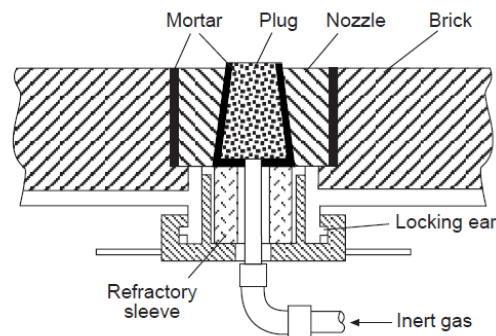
Schematic of a porous refractory plug mounted in the ladle bottom.⁶
